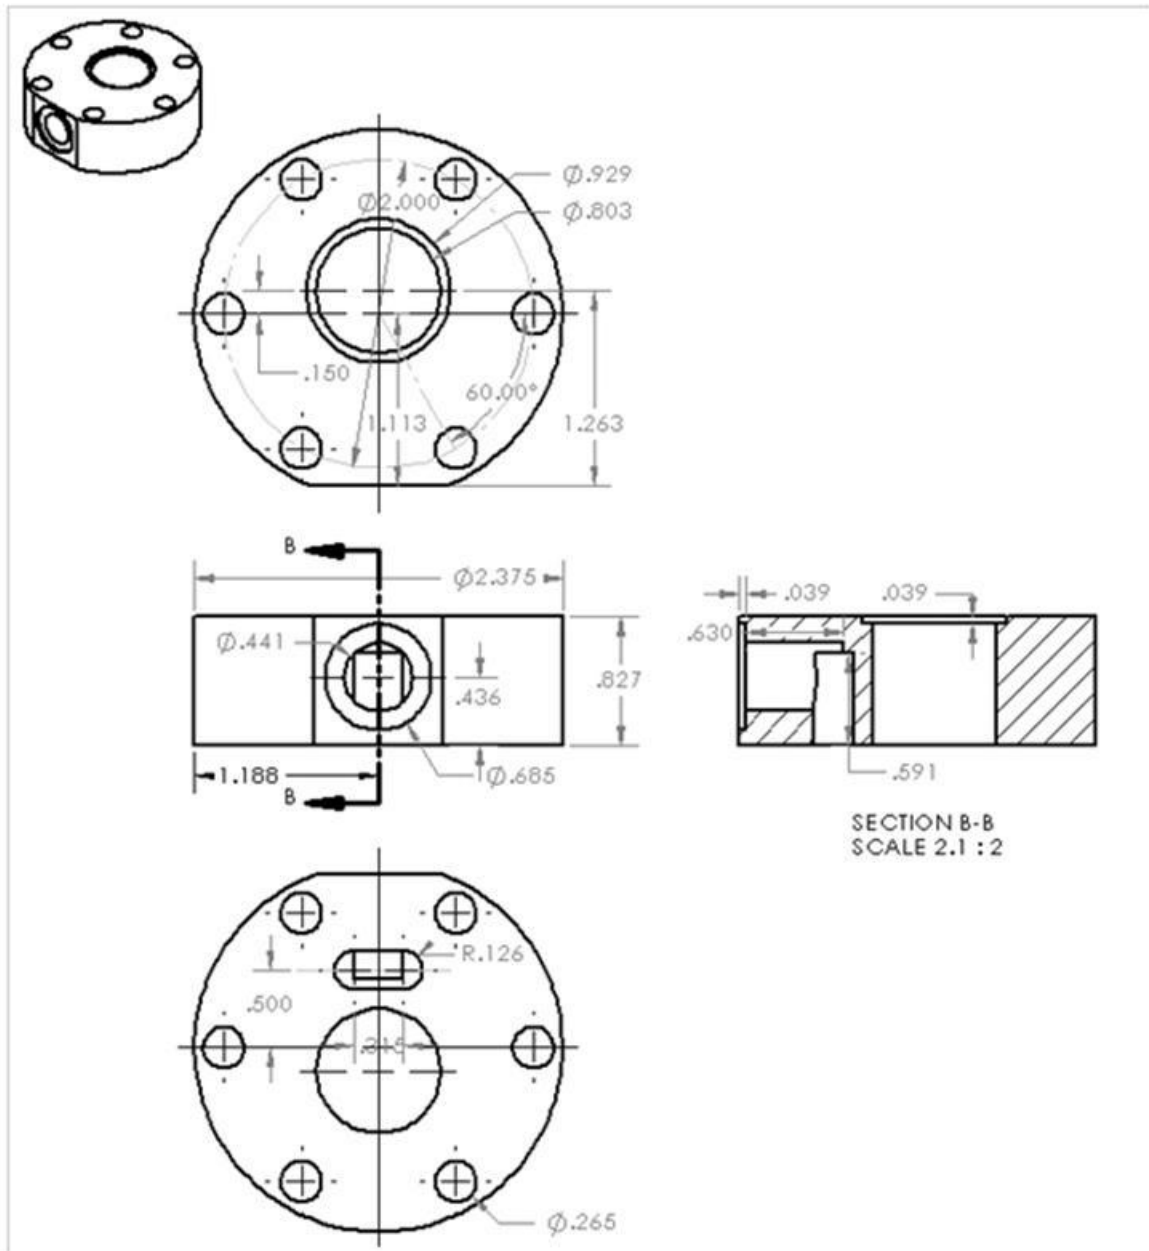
Large test casing bottom manifold showing bi-pass liquid outlet port.
